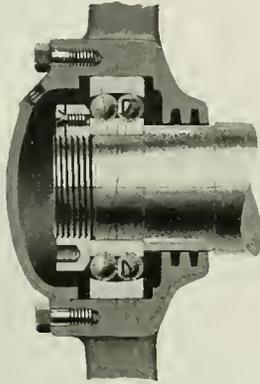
Sectional View of Ball Bearing Motor Head, showing the Sealing Grooves
